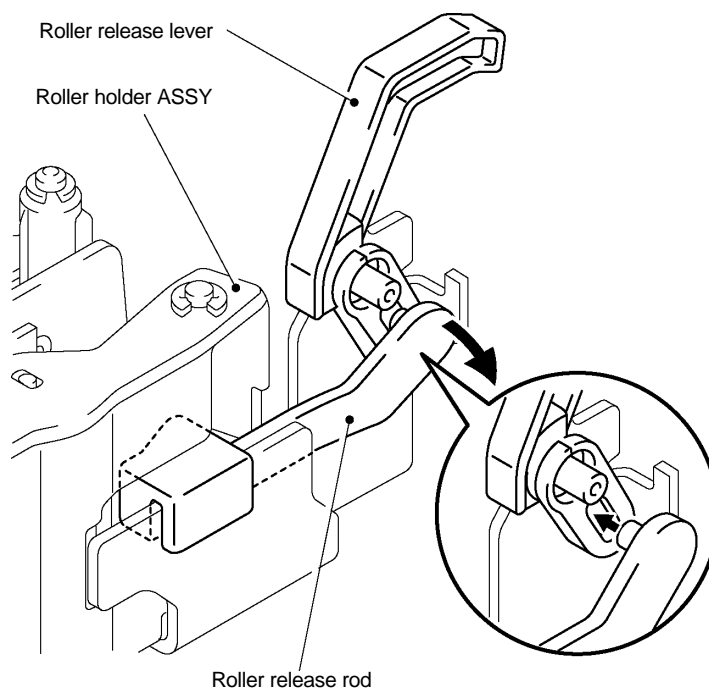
Assembling the Roller Holder ASSY
